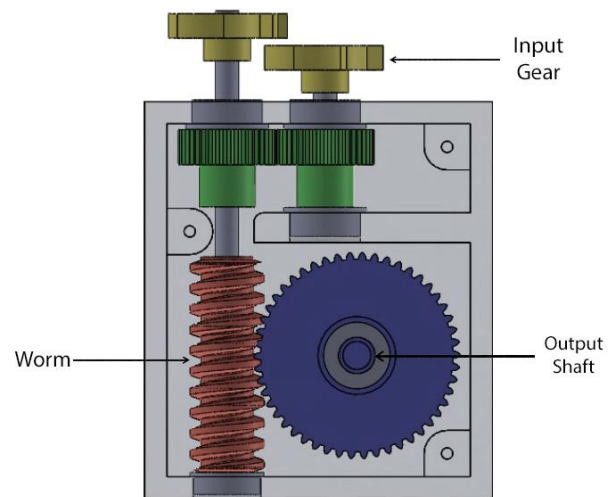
A front view of a prototype module showing the input gears, gear train, and output shaft. This module is used to convert the rotation of a motor into rotation in the output shaft.
